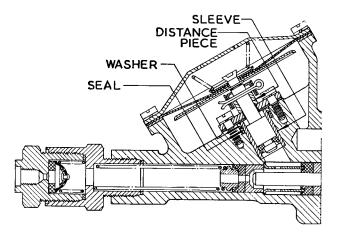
Section view showing the hydraulic check valve at end of slave cylinder and alternative type of control valve assembly.
